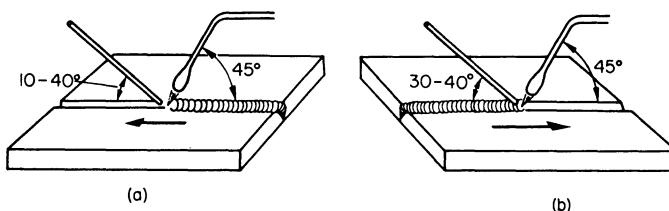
Welding techniques: (a) forehand (leftward); (b) backhand (rightward)
